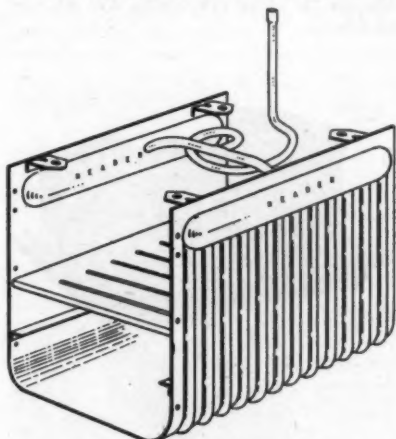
U-shaped Evaporator with tubes terminating in two headers
